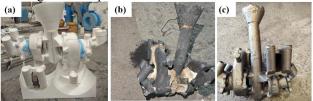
(a) Lost mold casting system (b) sand drop condition of castings after casting and (c) castings after shot blasting
